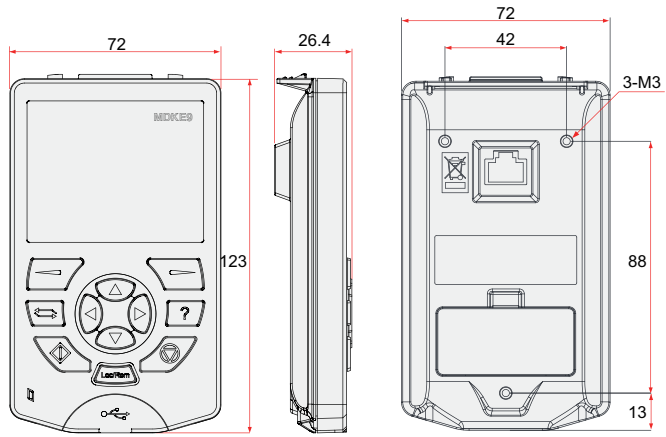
Dimensions of MDKE9 (unit: mm)
